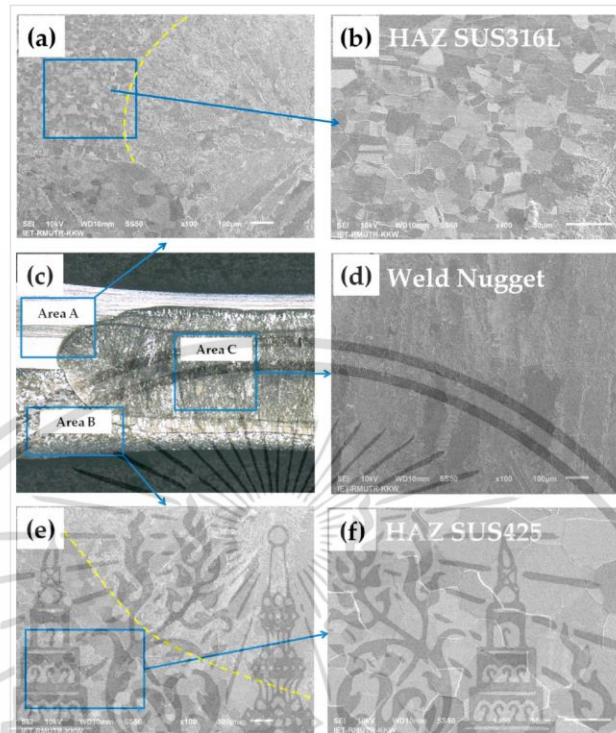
Cross-sectional microstructure of weldment under a 7.0 kA weld current and 25-cycle welding time.
